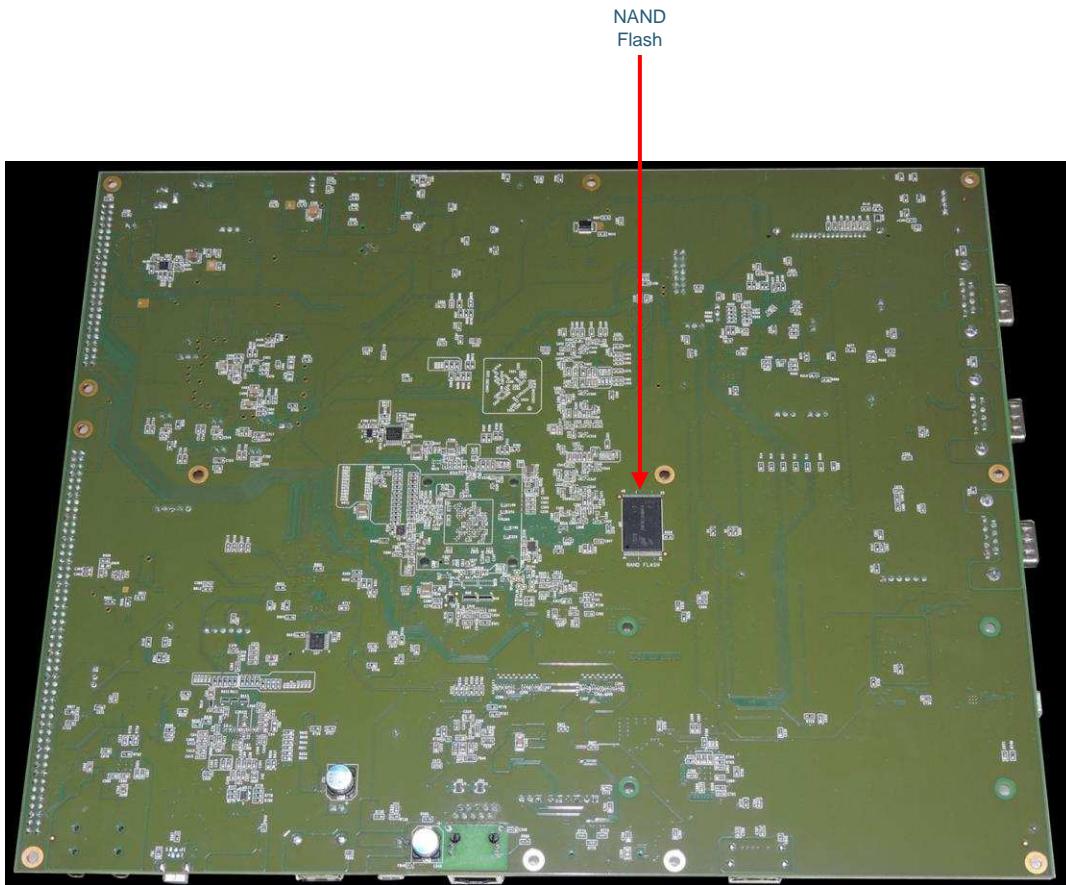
EVMK2G Board Assembly Pictorial - Bottom View
